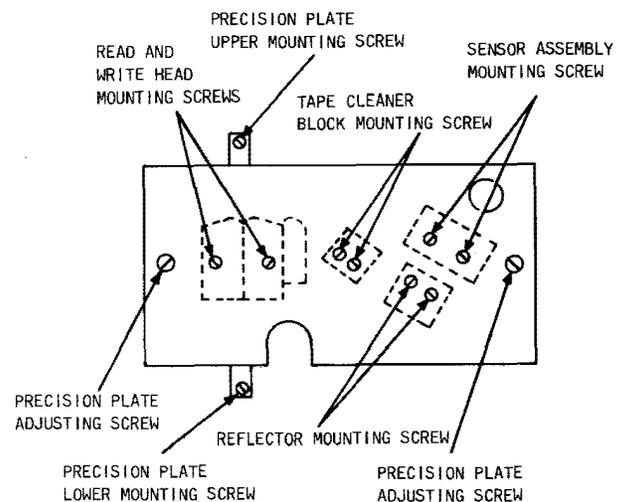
Precision Plate Assembly (L3 Recorder)—Rear View Showing Component Mounting Screws
